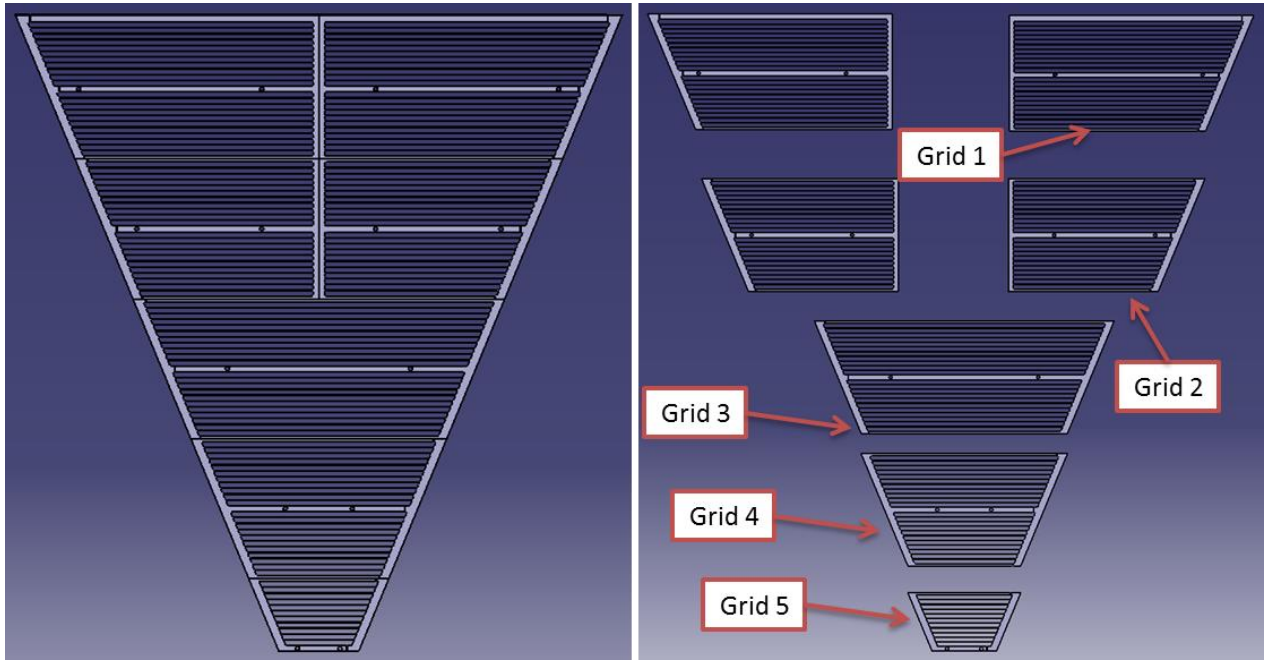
Assembly of the grid plane (left) and exploded view of the plane (right).
